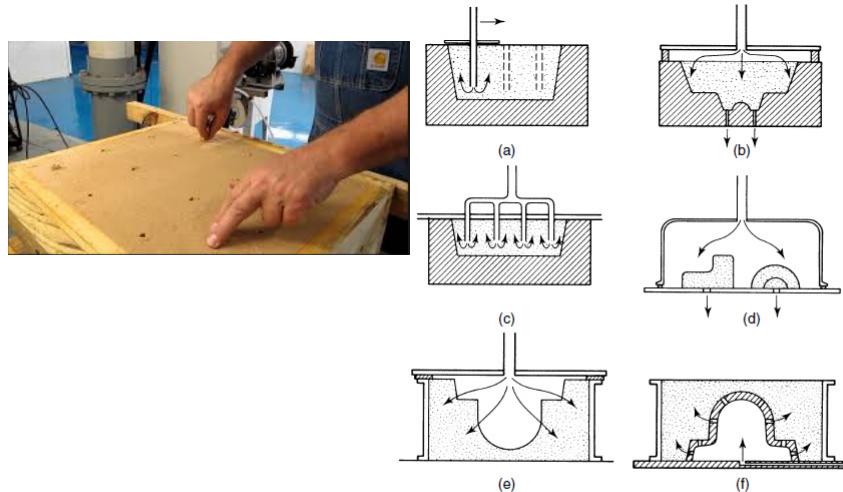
Examples of systems for carbon dioxide hardening of cores and mould parts: (a) progressive treatment using single probe, (b) cover board or hood, (c) multiple probe and manifold, (d) hood over previously stripped cores, (e) treatment of mould after pattern draw, (f) passage of gas through hollow pattern
